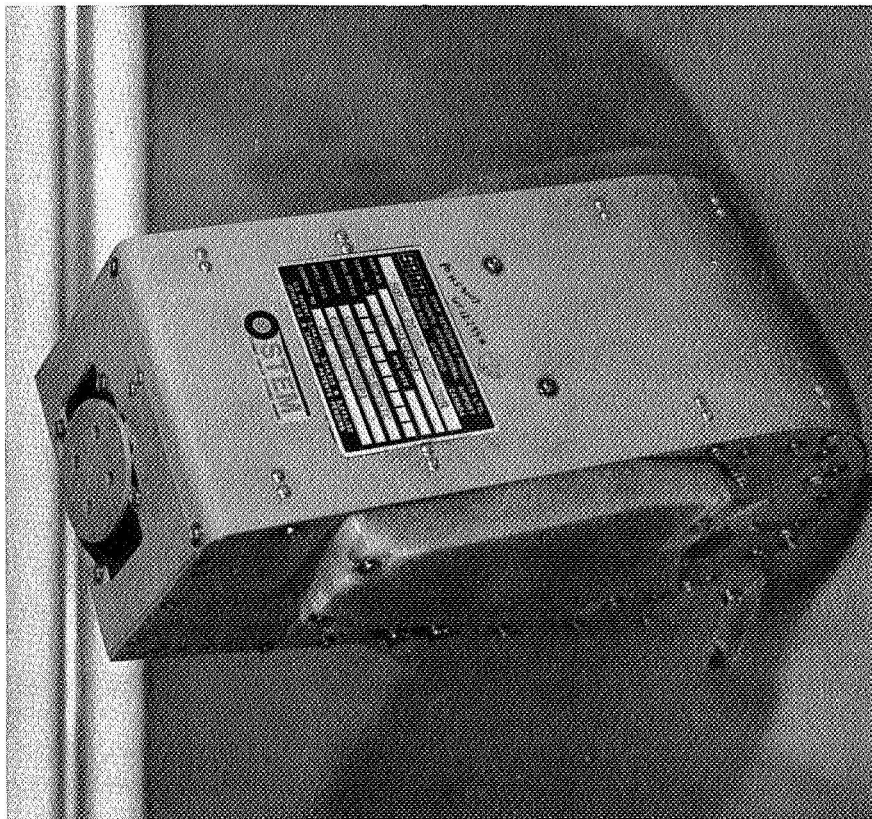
RA250 Mechanical Assembly (Less Solar Array Blankets)
